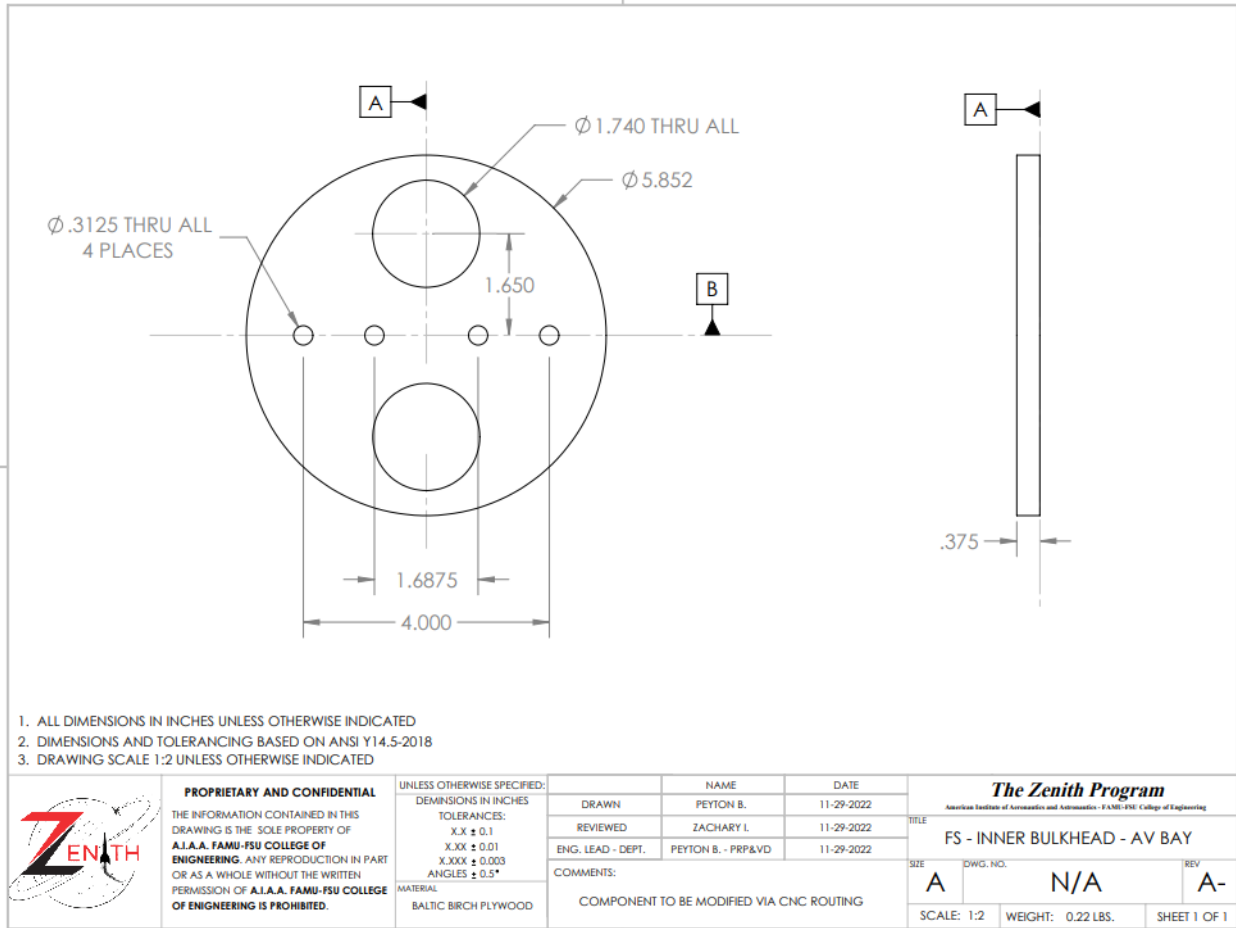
AV Bay Inner Bulkhead CAD Drawing
